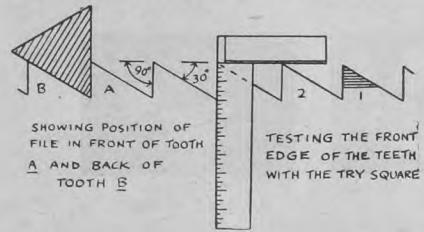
Ripsaw teeth, showing angles and cutting edges.
